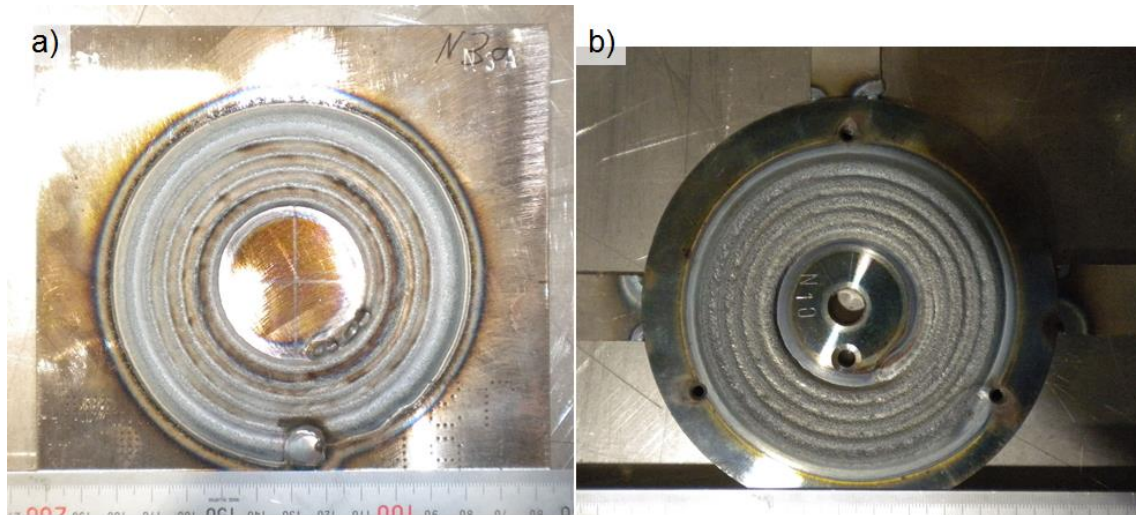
Two ways to produce the WC reinforced layer; a) Cladding before machining; b) Cladding on a machined sample
